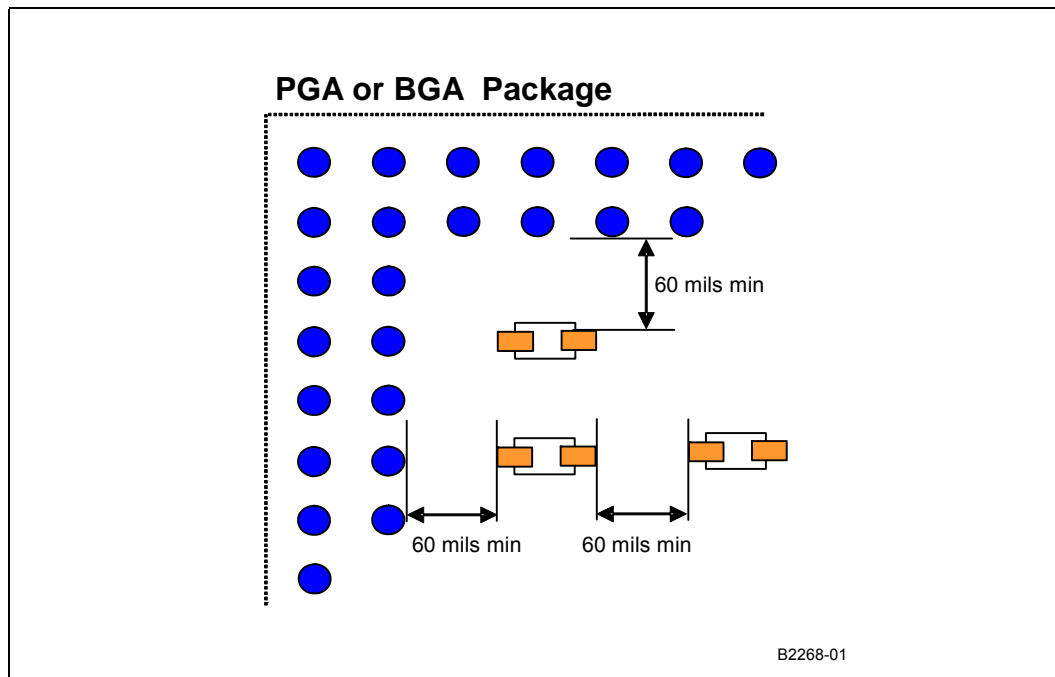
Pad-to-Pad Clearance of Passive Components to a PGA or BGA
